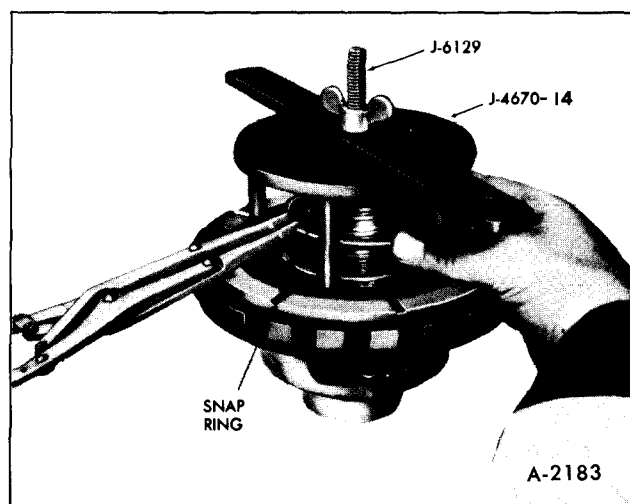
Removing Intermediate Clutch Retaining Snap Ring
